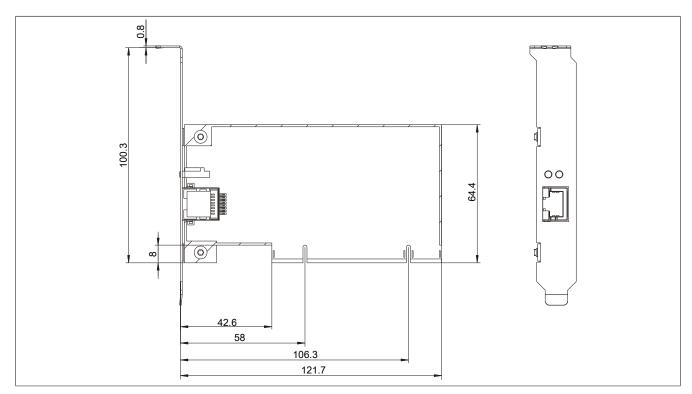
5ACPCI.ETH1-01 - Dimensions
